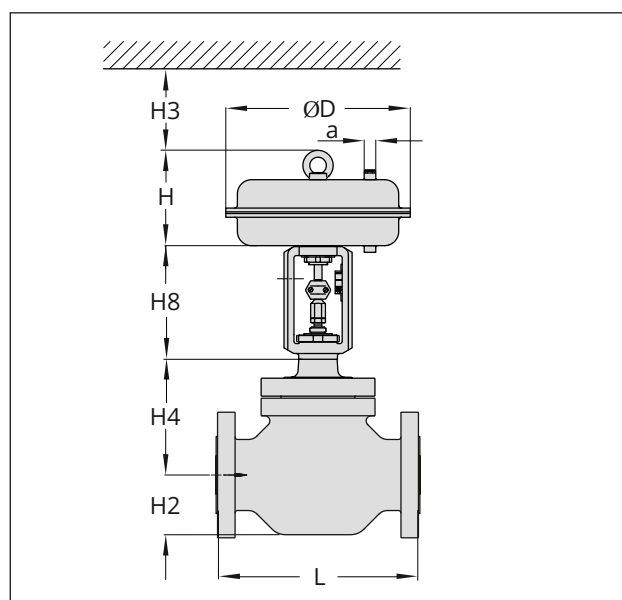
Type 3251-1/3251-AM-1 up to DN 80/NPS 3 without foot (Type 3251/3251-AM Valve with Type 3271 Pneumatic Actuator)
